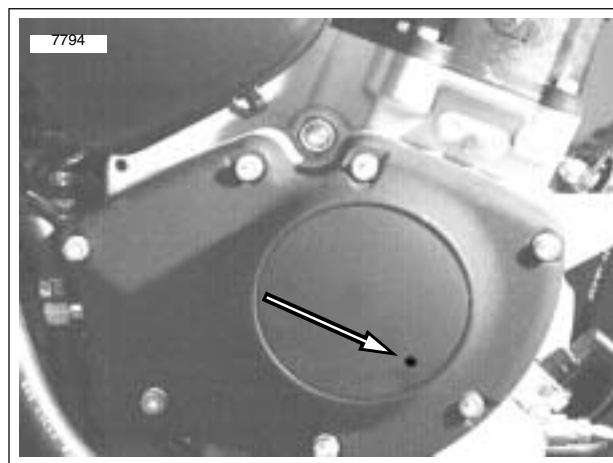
Drill Hole Location for Drilling/Removing Timer Cover
